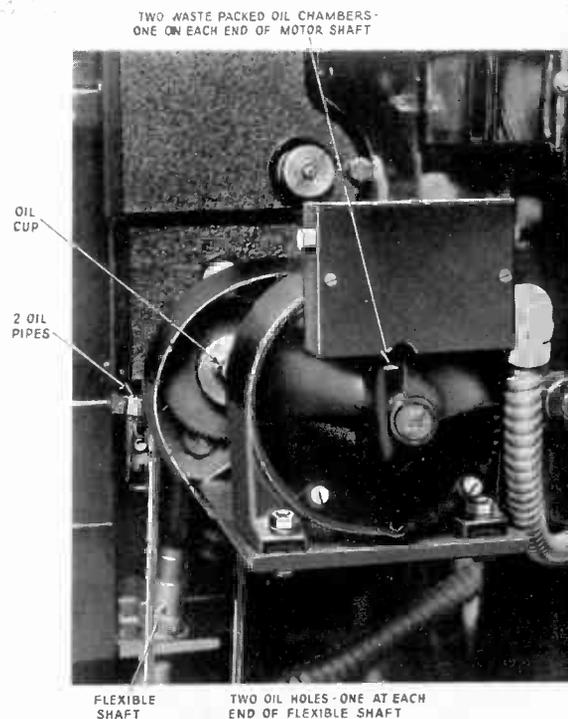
Oiling points in drive side of Type PS-16 sound head (AC motor drive)
